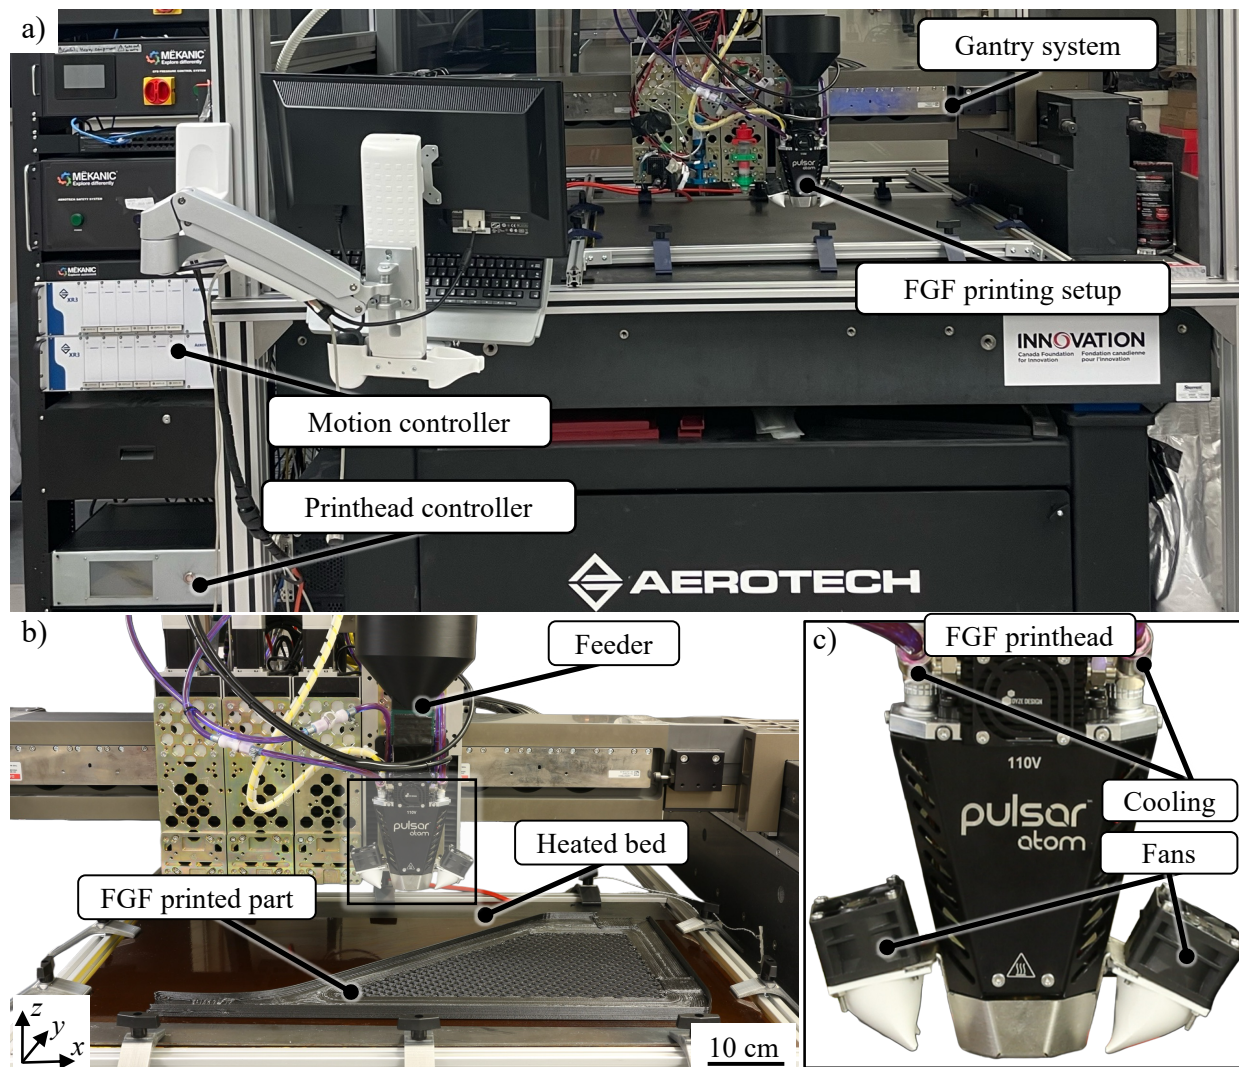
Developed medium-scale FGF platform: (a) overall system architecture; (b) printing envelope including the gravity-fed pellet feeder and heated build plate; and (c) printhead assembly showing the liquid-cooling system and part-cooling fans
